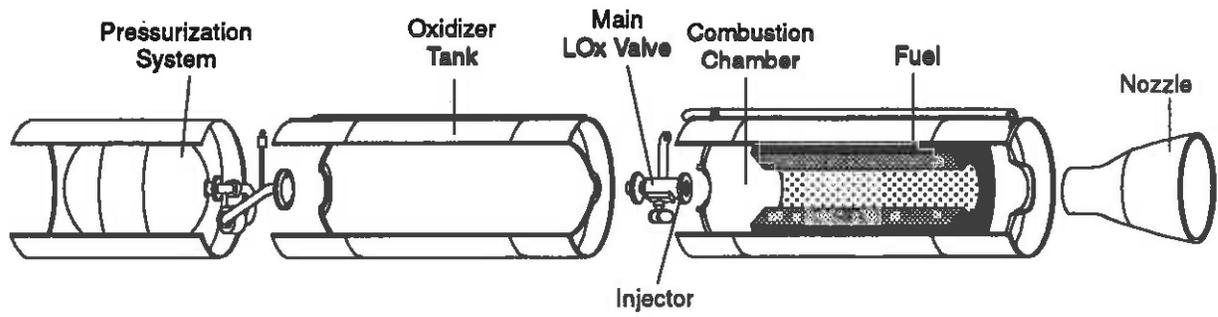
A Sketch of a Classical Hybrid Rocket Motor
